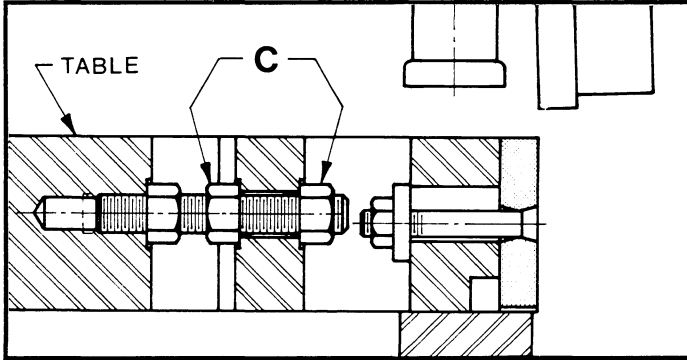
Lower knife adjustment (375-750 Series)
